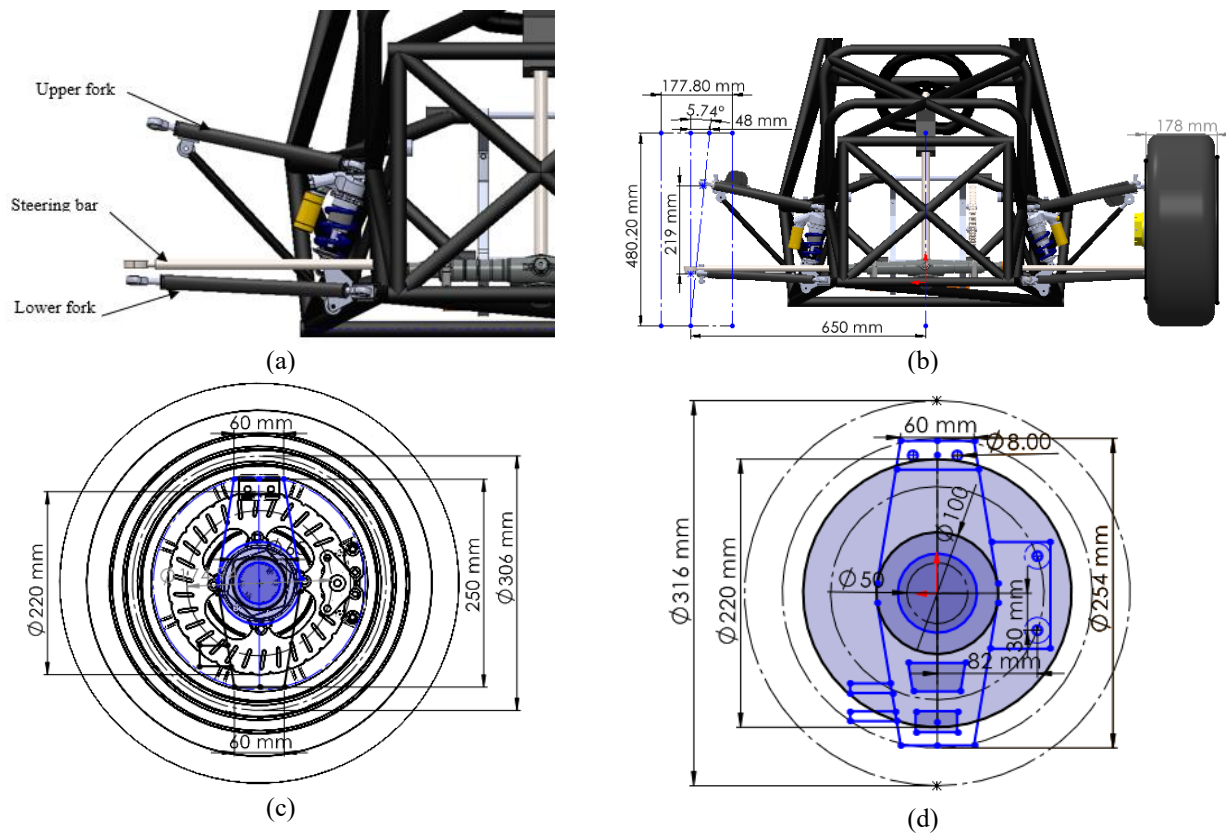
Front Suspension: (a) components, and (b) dimensions. Front steering knuckle: (c) base geometry for the design, and (d) initial sketch of the body's geometry
